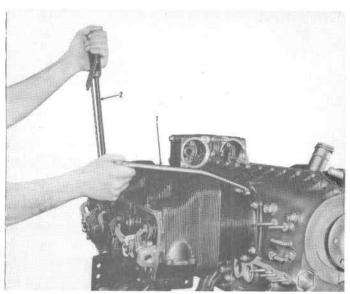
TIGHTENING CYLINDER BASE NUT.
